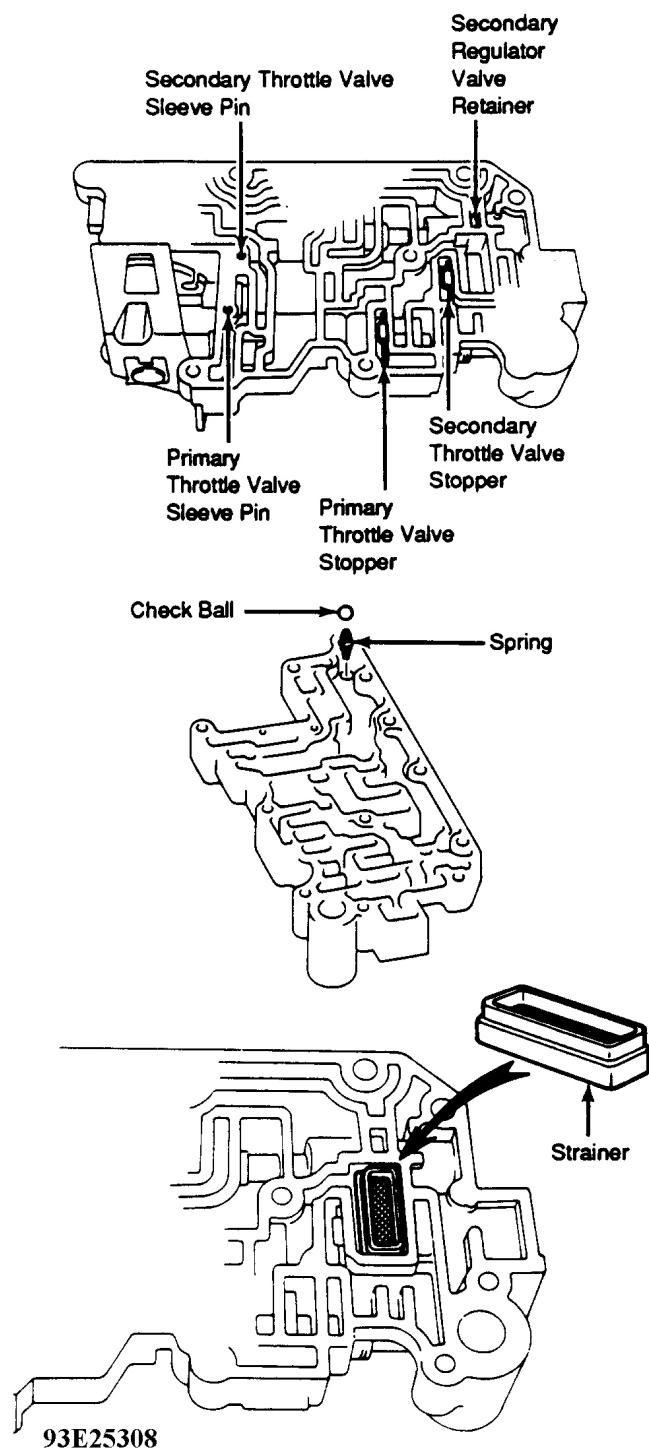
Front Upper Valve Body Pin, Retainer, Check Ball & Strainer
